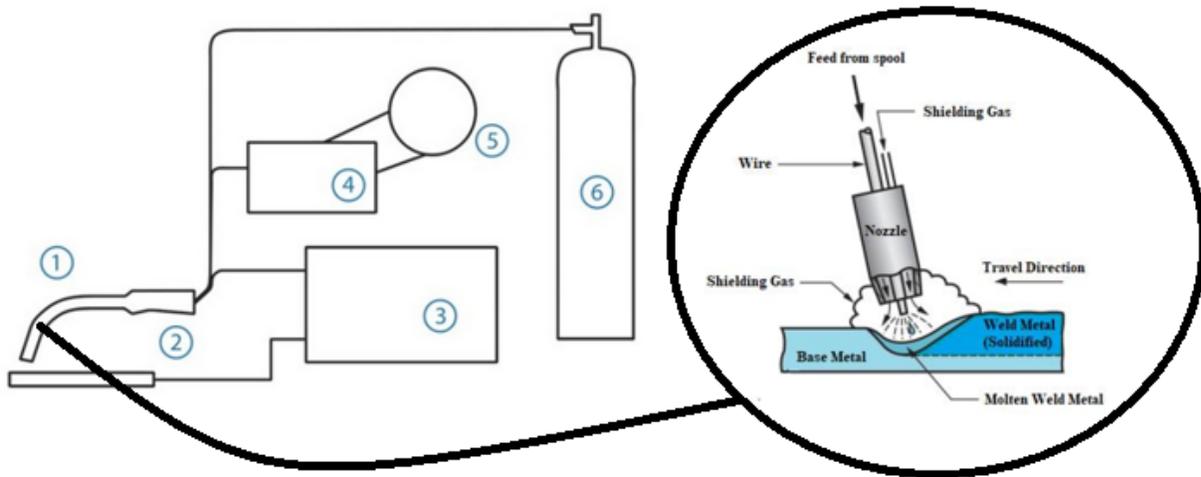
Gas Metal Arc Welding Process (Mod. P.Elango, 2015).
